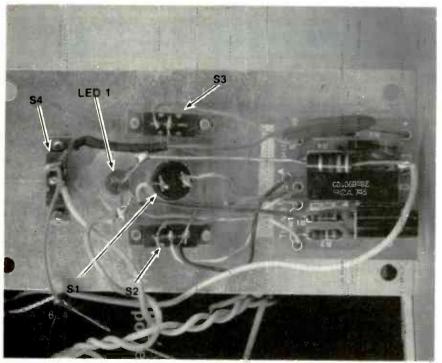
SWITCHES AND LED are mounted from component-side of PC board. Switch mountingnuts secure assembly to top of case.
